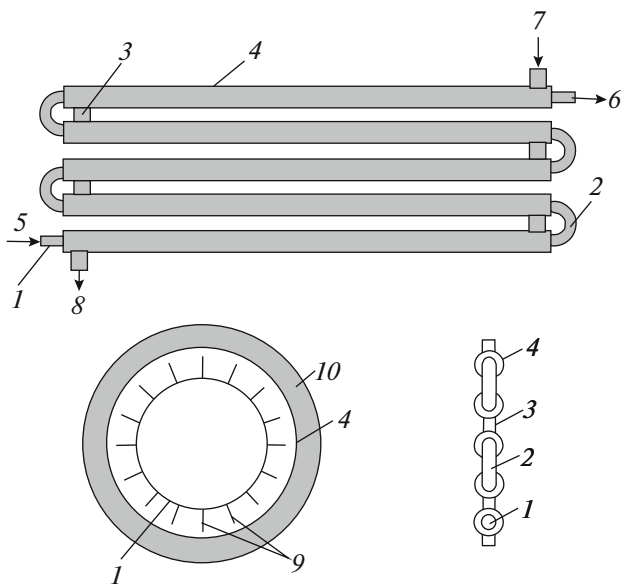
Tube-in-tube heat exchanger with longitudinal ribbing of the heat exchange surface: 1—internal tube; 2—return bend; 3—connecting branch; 4—heat-insulated external tube; 5—delivery of the geothermal heat carrier; 6—cooled heat carrier drainage; 7—delivery of the heat carrier to be heated; 8—heated heat carrier withdrawal; 9—longitudinal heat transfer ribs; 10—thermal insulation.
